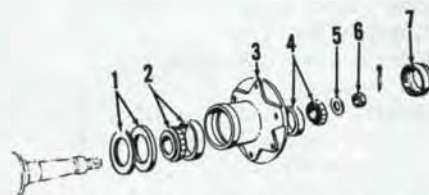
Exploded view of wheel hub and bearing used on dual wheel tricycle and wide front axle models.
